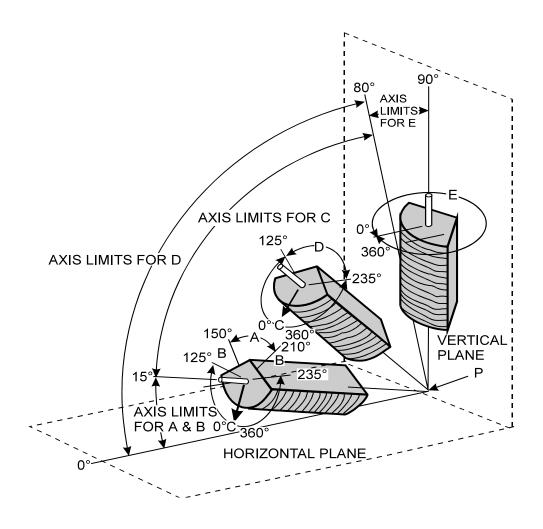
Positions of Fillet Welds (see 4.2.5)
